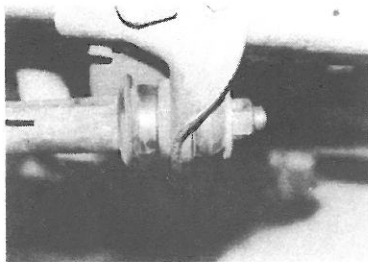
Check bushing to make sure there is no excessive cracking or weather checking.
